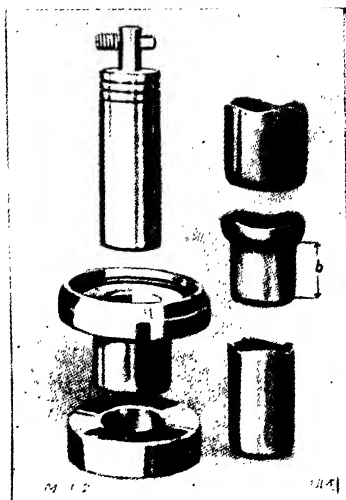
Left* : Set of re-drawing tools for deep-drawing a standard cup in the Erichsen machine.
